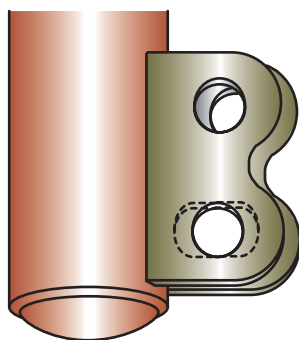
Slotted upper strut bearing plates provide camber adjustment on some MacPherson strut front suspension systems.
